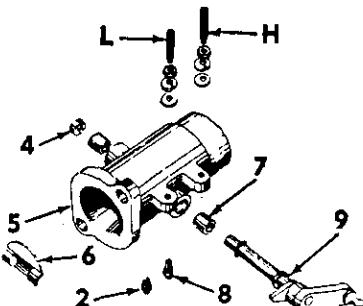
Exploded view of the venturi and component parts used on early B-275 tractors fitted with injection pump having pneumatic governor.
